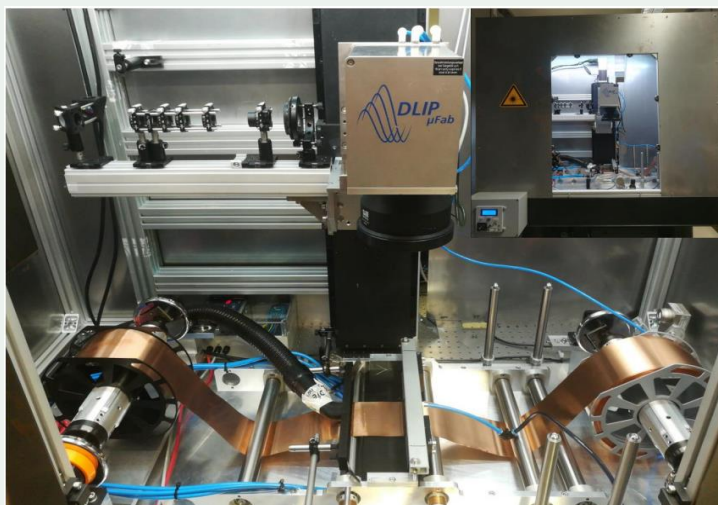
A photograph of the roll-to-roll (R2R) machine to DLIP texture the copper busbars.
